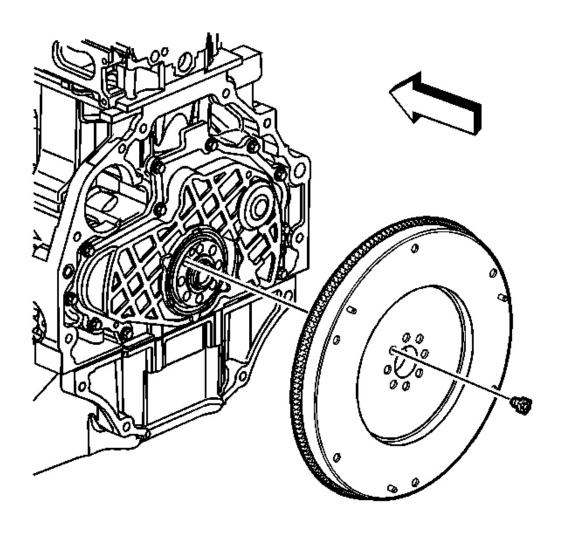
View Of Engine Flywheel - Manual Transmission Courtesy of GENERAL MOTORS CORP.
